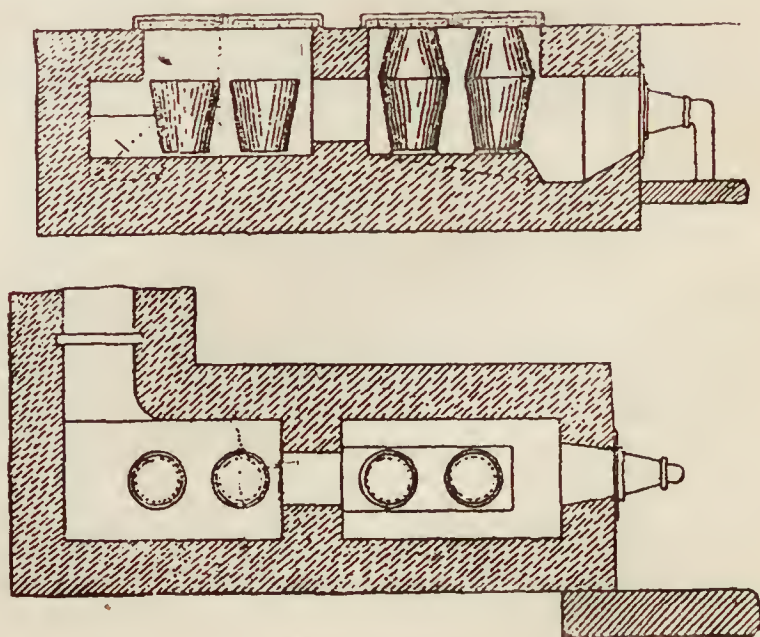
SECTIONAL VIEW OF APPARATUS FITTED TO BOILER.
